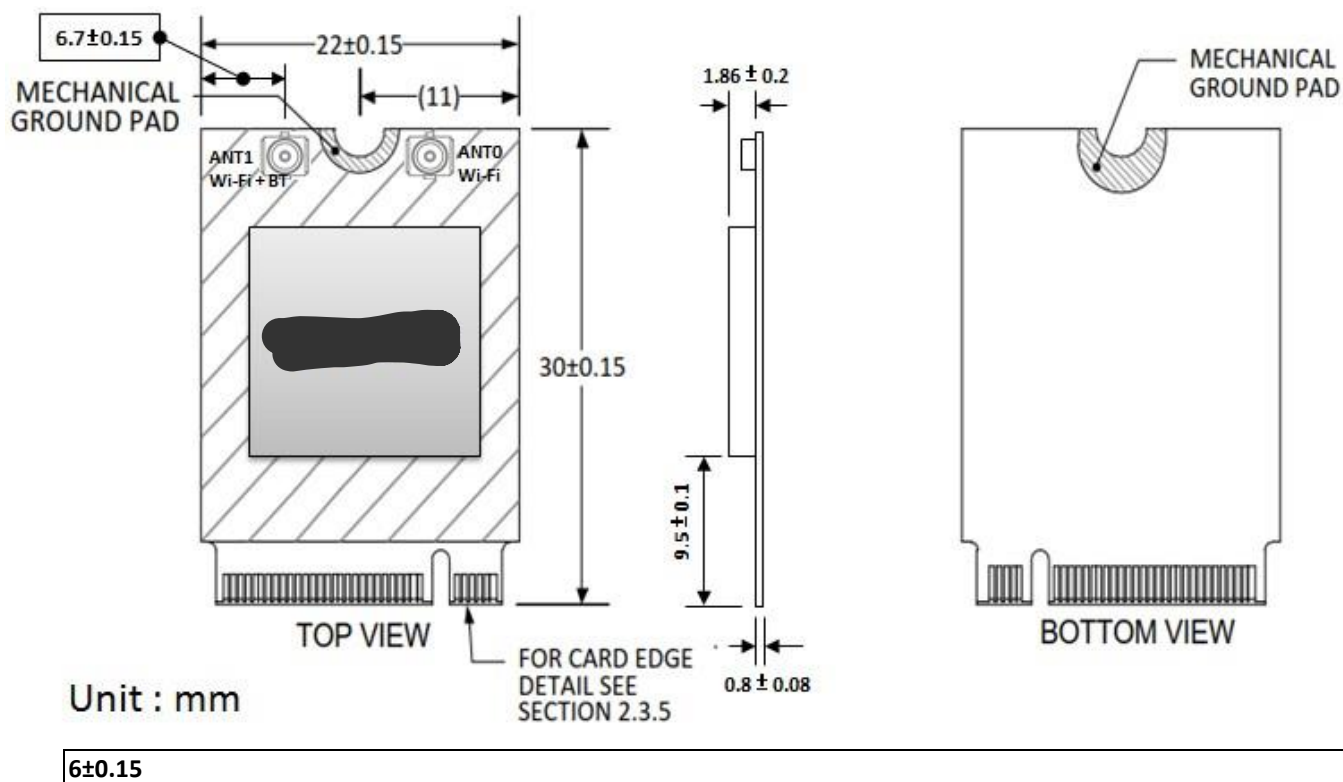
Module dimension of ST60-2230C-P/ST60-2230C-PU
